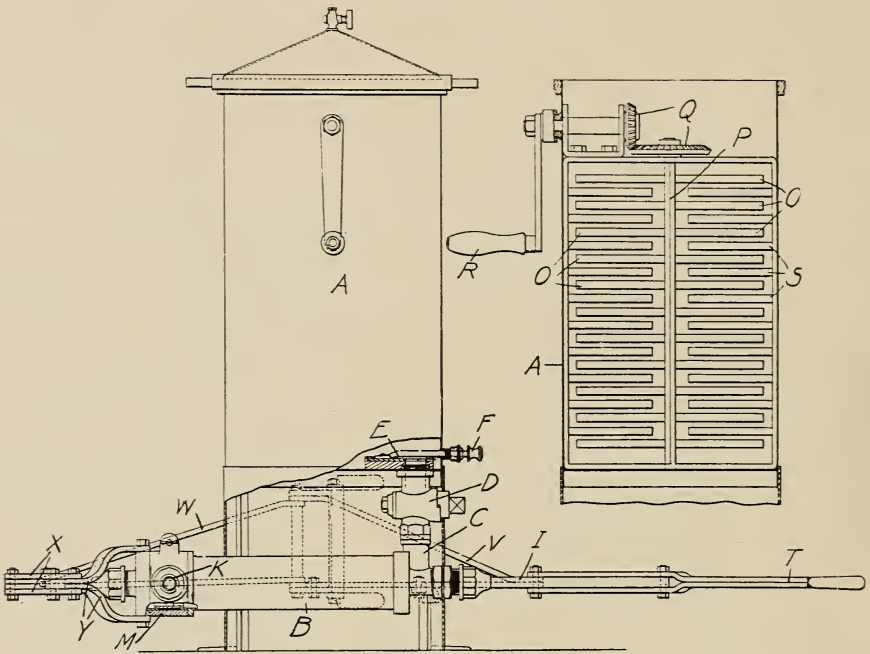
SIDE VIEW OF THE BRETT MACHINE FOR FILLING TUBES.
